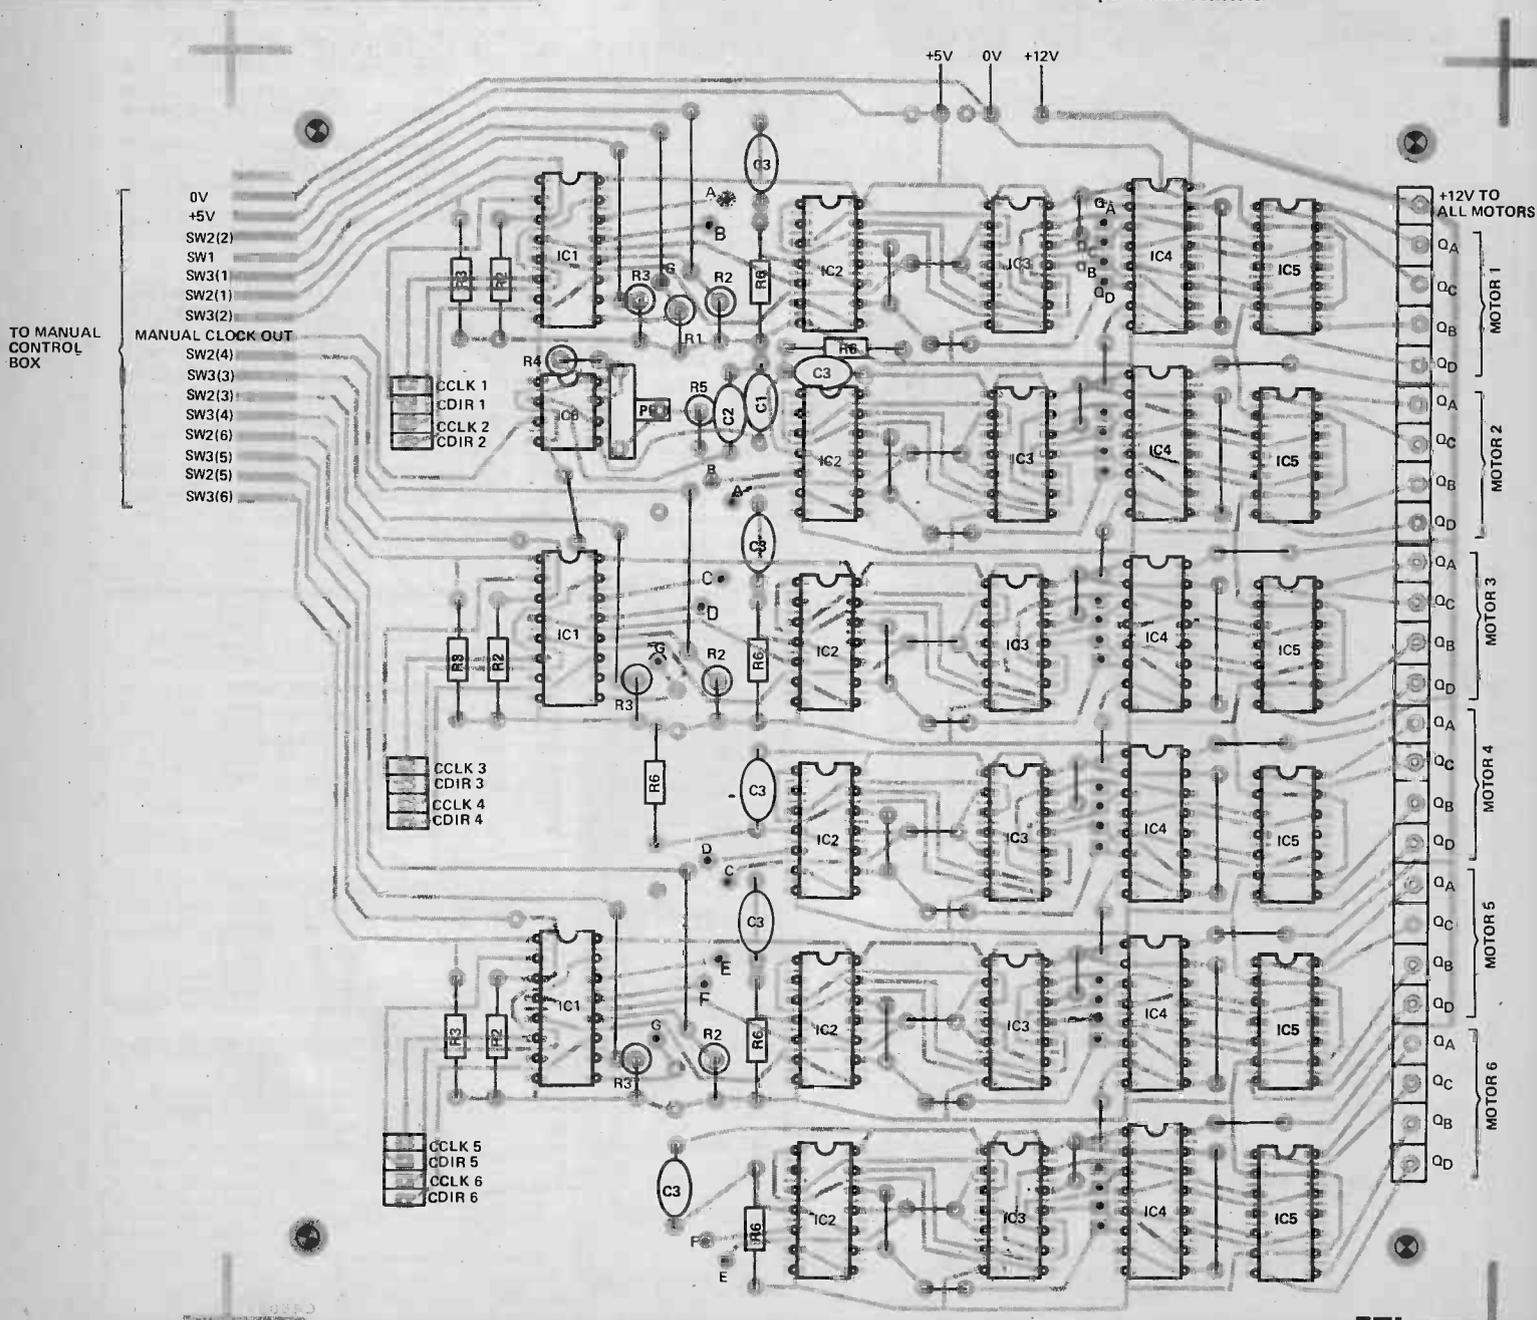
Interface board overlay. The connection to the computer port will depend on your particular machine.
